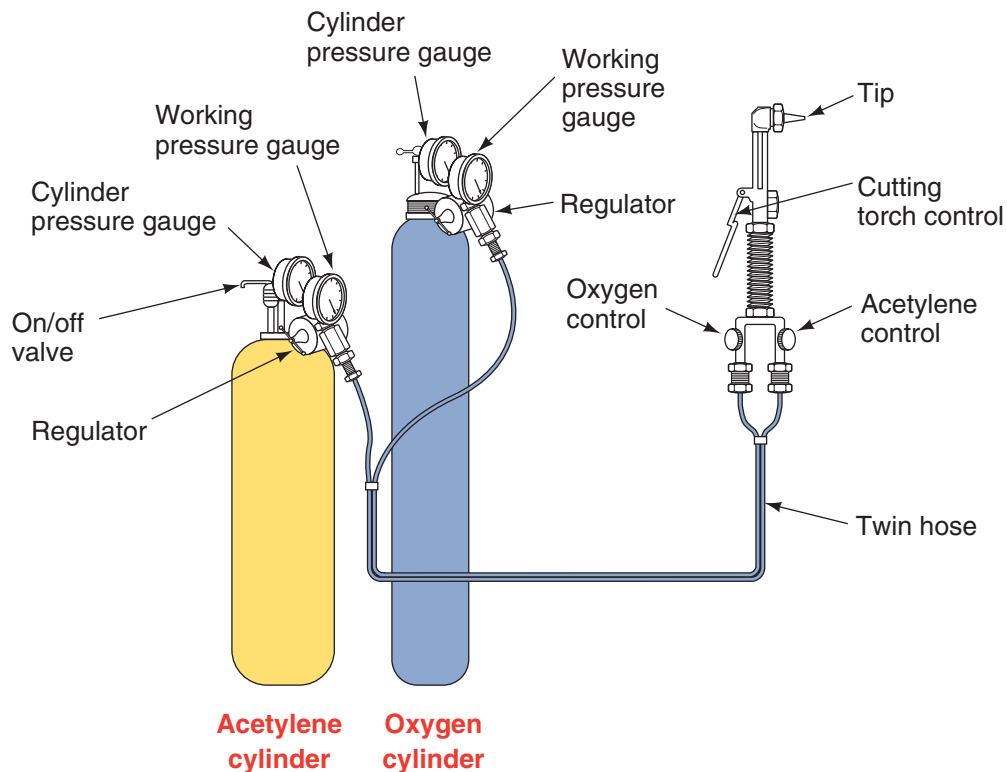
Oxyacetylene welding equipment shown with a cutting torch.
